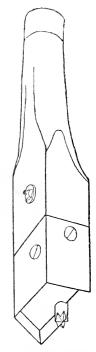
Tool for cutting cards of tarred building paper. After Slingerland.
